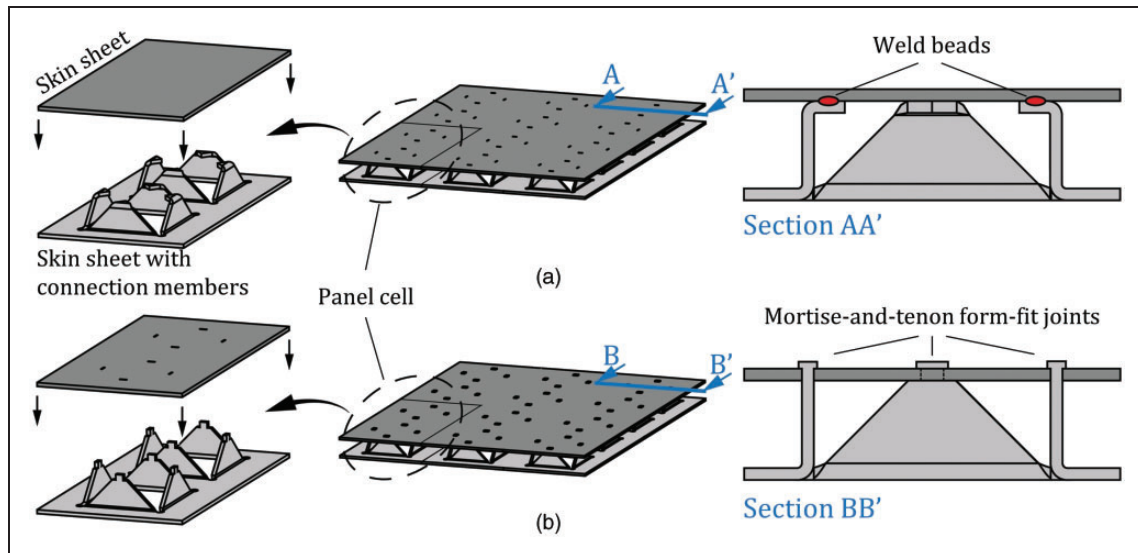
Schematic representation of all-metal sandwich panels based on the Opencell structure concept assembled through different joining technologies: (a) welding and (b) joining by forming. Cross-section details are provided for each type of joint.
